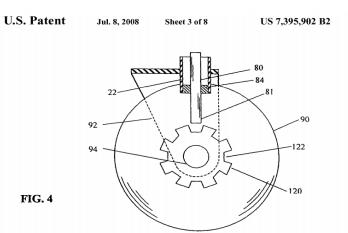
Here we can see the braking mechanism itself on the wheel. (120) shows a breaking gear that is used to immobilize the wheel when not in use. The gear, which will be made of plastic, is only capable of moving once the linkage rod is removed from one of the respective the indents. (D'Arca et al., 2008)
